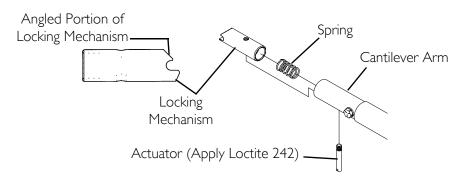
Adjusting Cantilever Arm Pad Depth/Replacing Cantilever Arm Pad
